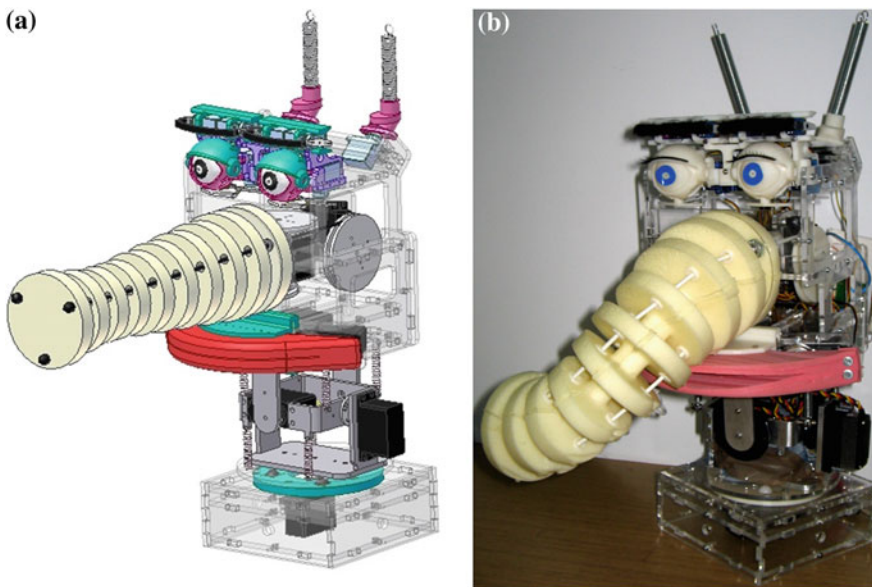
New design of the robot Probo. a CAD solution. b Real prototype
